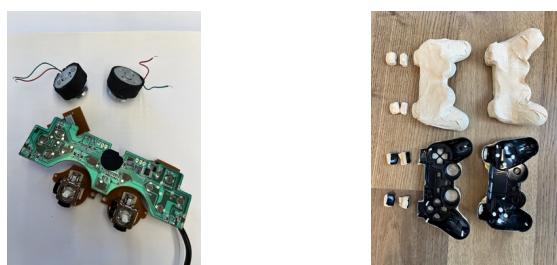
Desoldering of the magnetic parts and preparation before the spraycoating
